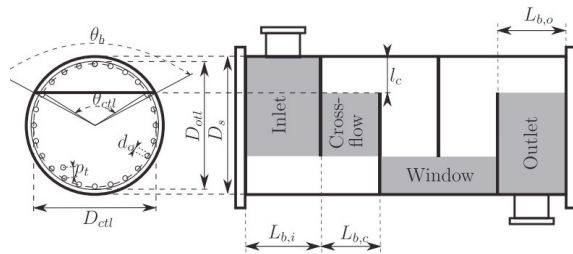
Shell-and-tube heat exchanger geometry and tube pattern
